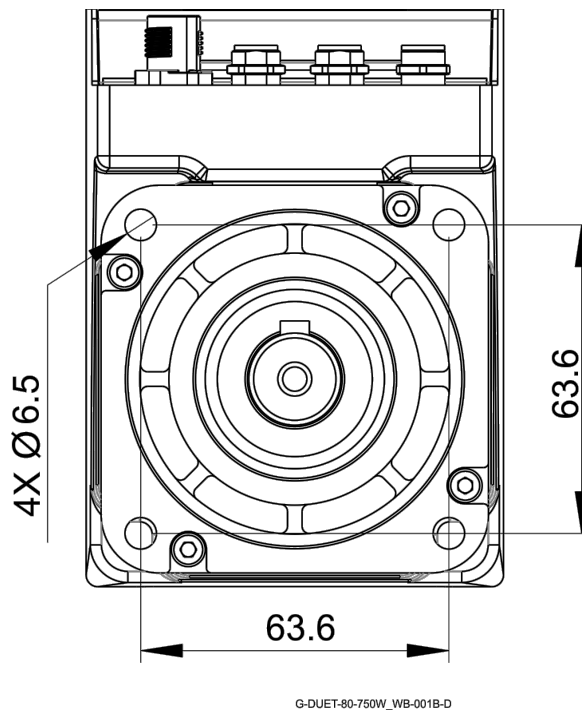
Front View Details and Rotor Shaft/Keyway Details
